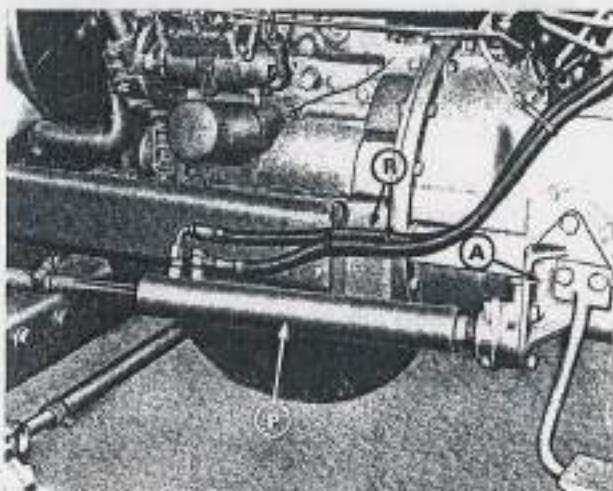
Location of the steering ram fitted to 350 Tractors
